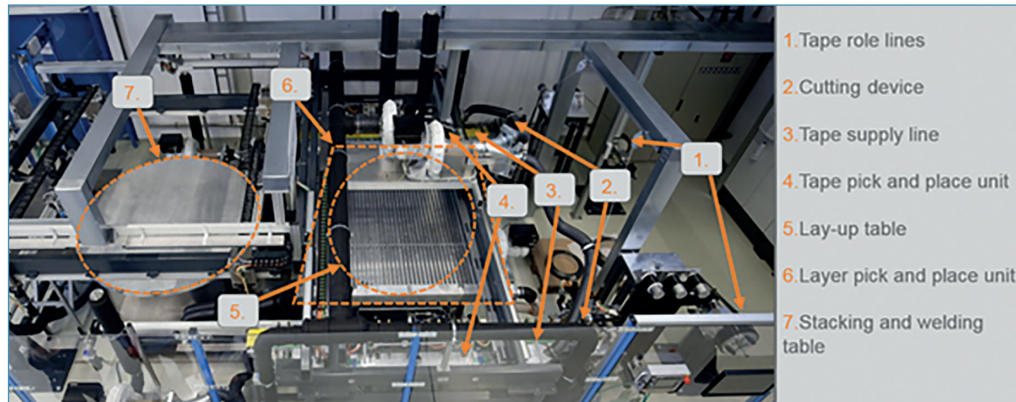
Overview of the tape laying machine (TLM) with its main components: tape role lines, lay-up table and stacking and welding table
